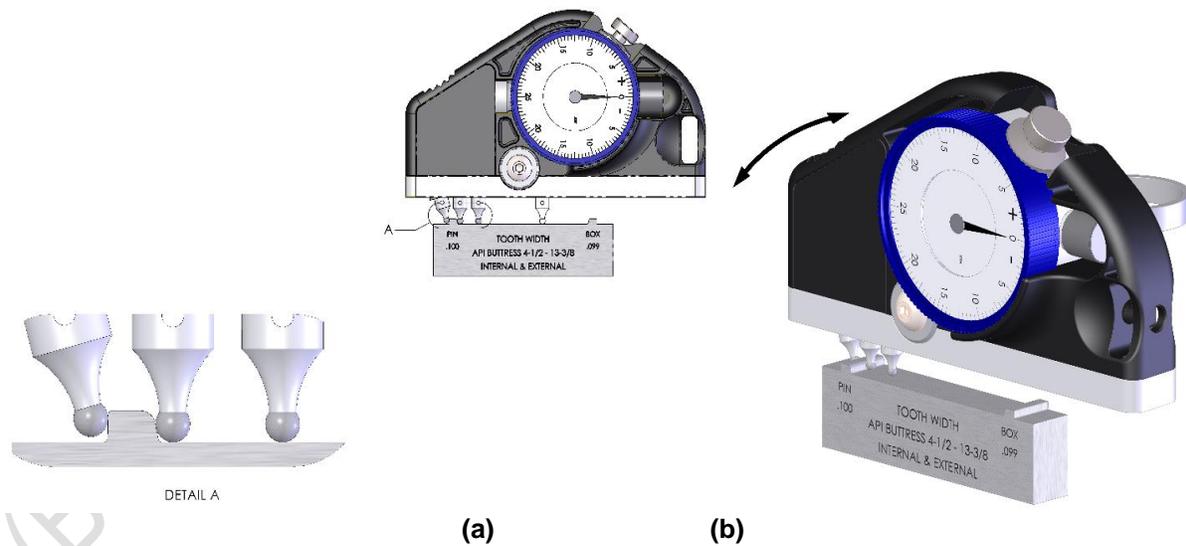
Setting Single Dial Buttress Form Gauge and Standards
